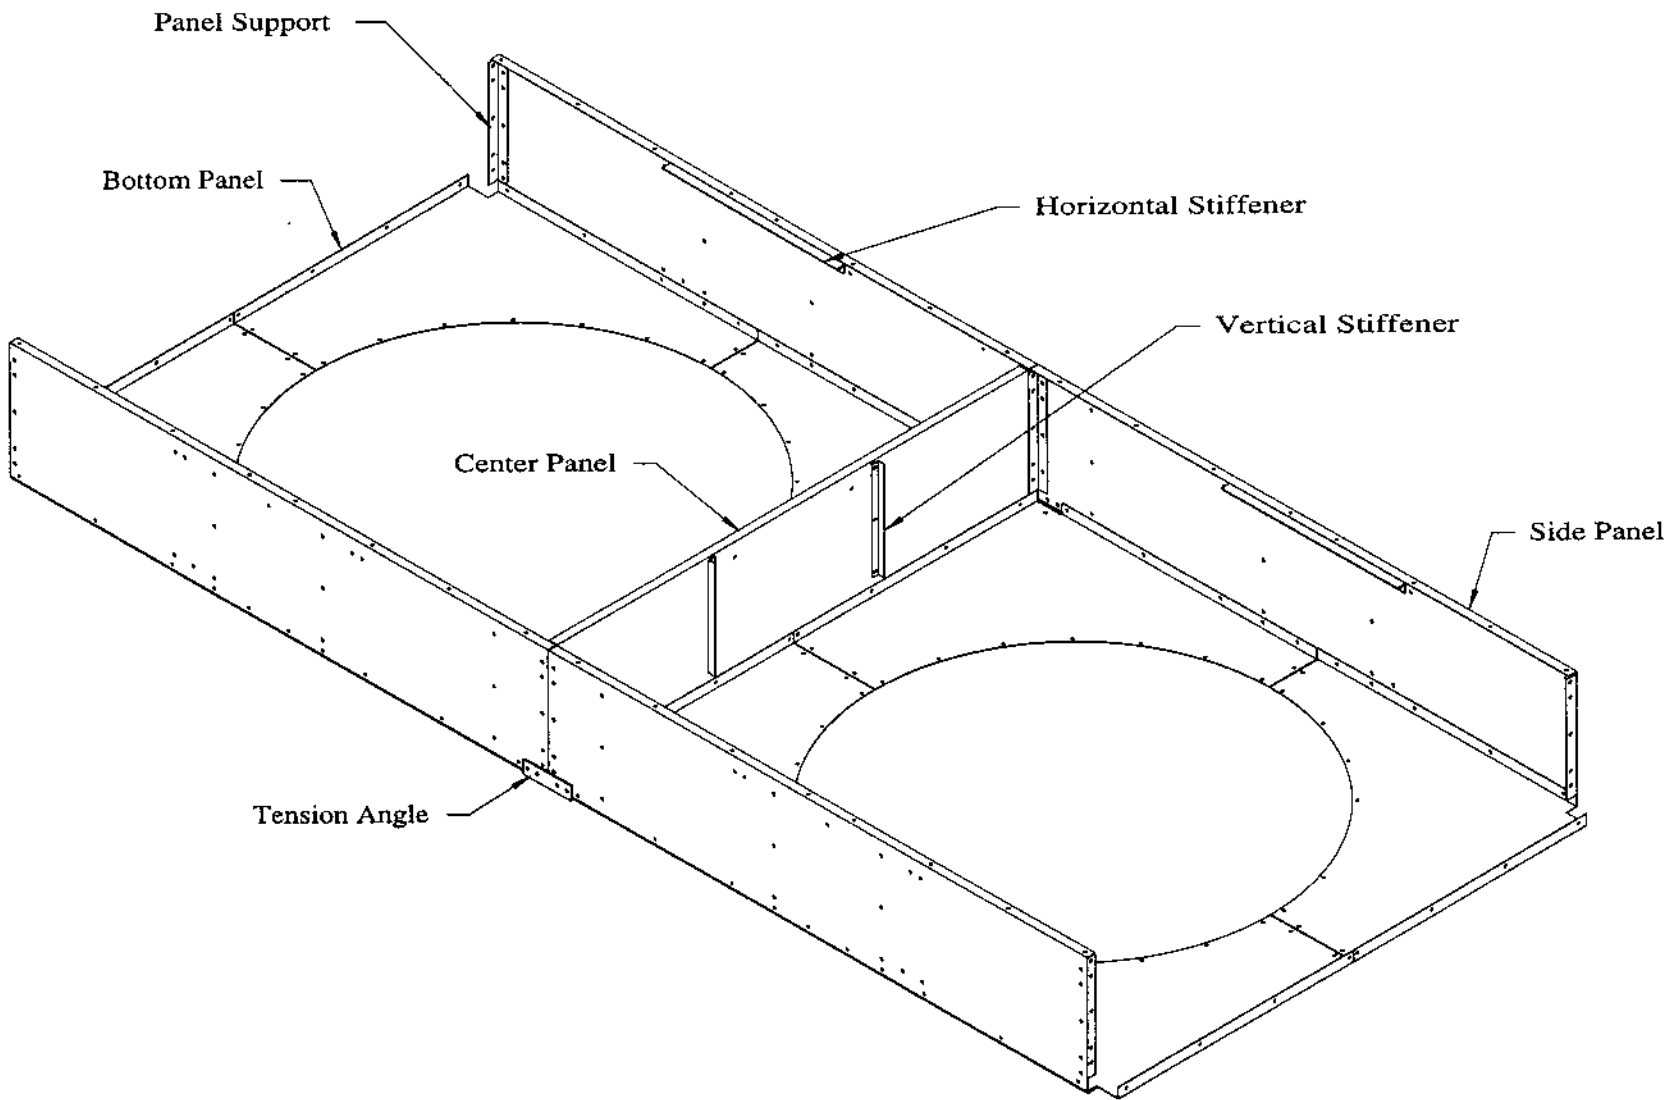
BOTTOM, CENTER, AND SIDE PANELS
